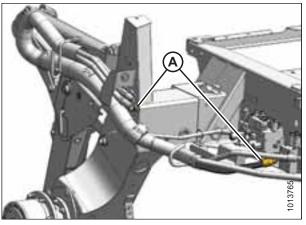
Auger Header Drive and Draper Header Reel Drive and Lift Plumbing Kit (MD #B4651)
